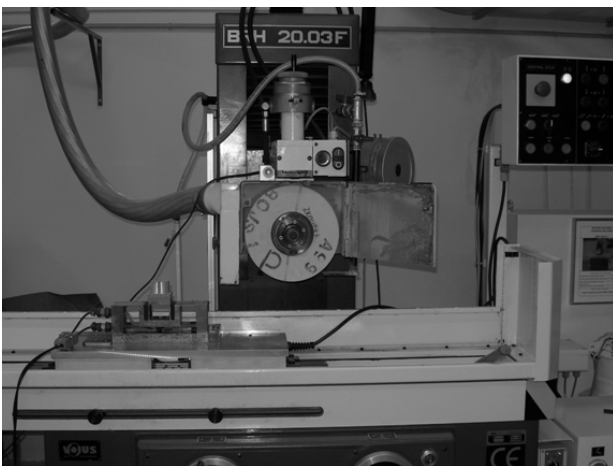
Replacement of the A99 K80 9V OPEN F 20.03 grinding wheel in the process of experimentation.
